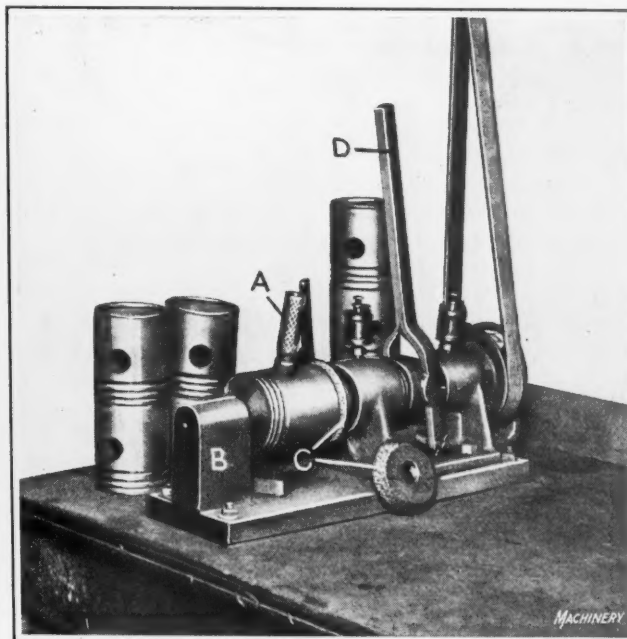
Special Machine designed and built for Use in grinding the Center Bearing in the Open End of the Piston
